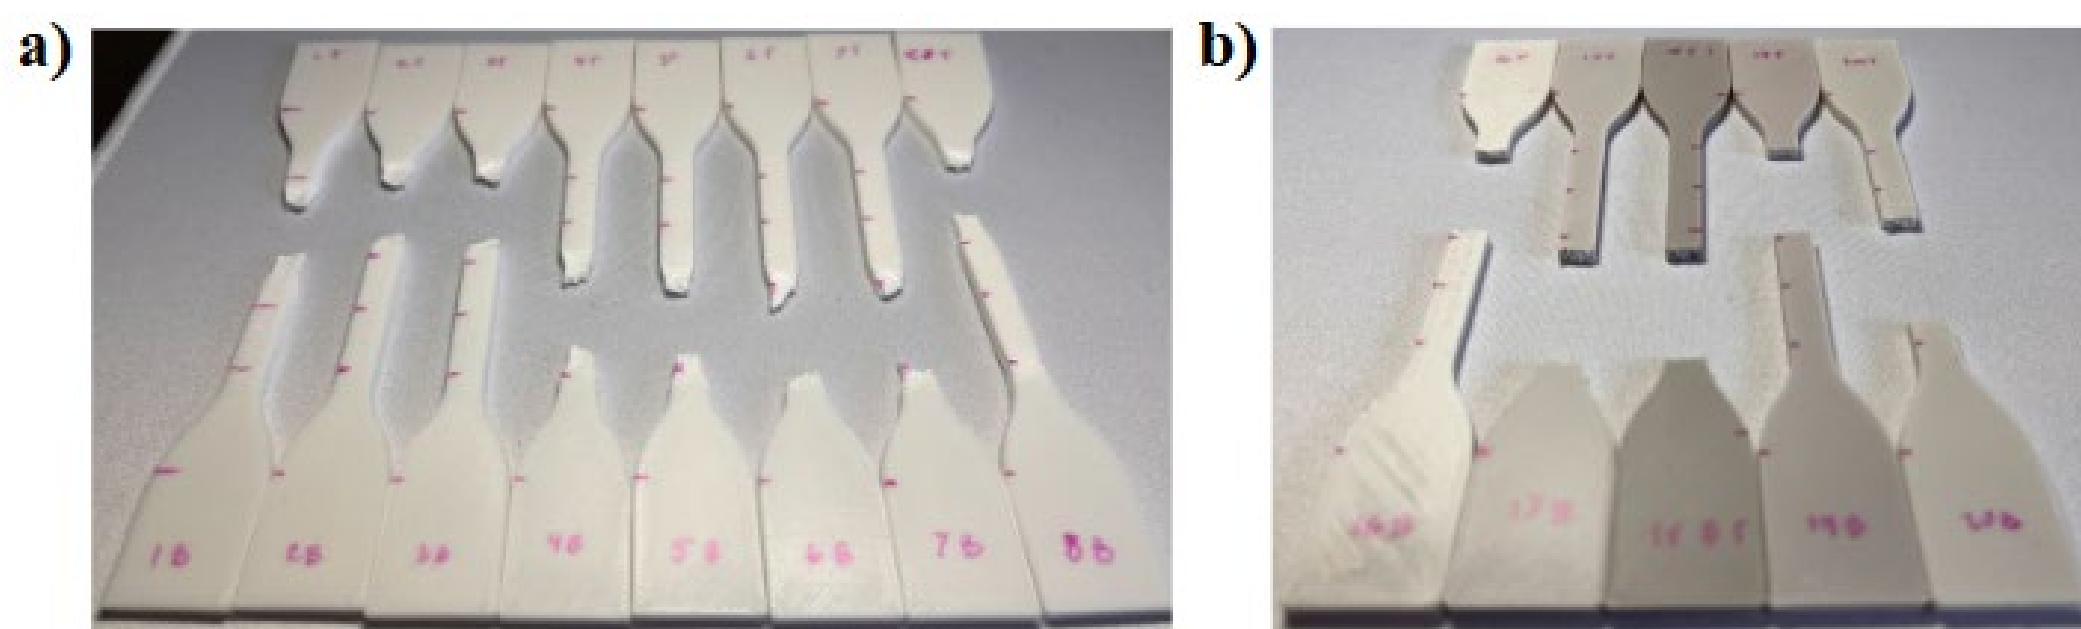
Tensile specimens after testing. a) PLA 45°/ 45° specimens after failure, showing yielding in gauge length. b) tPLA_c 45°/ 45° specimens after failure, showing brittle fracture.
